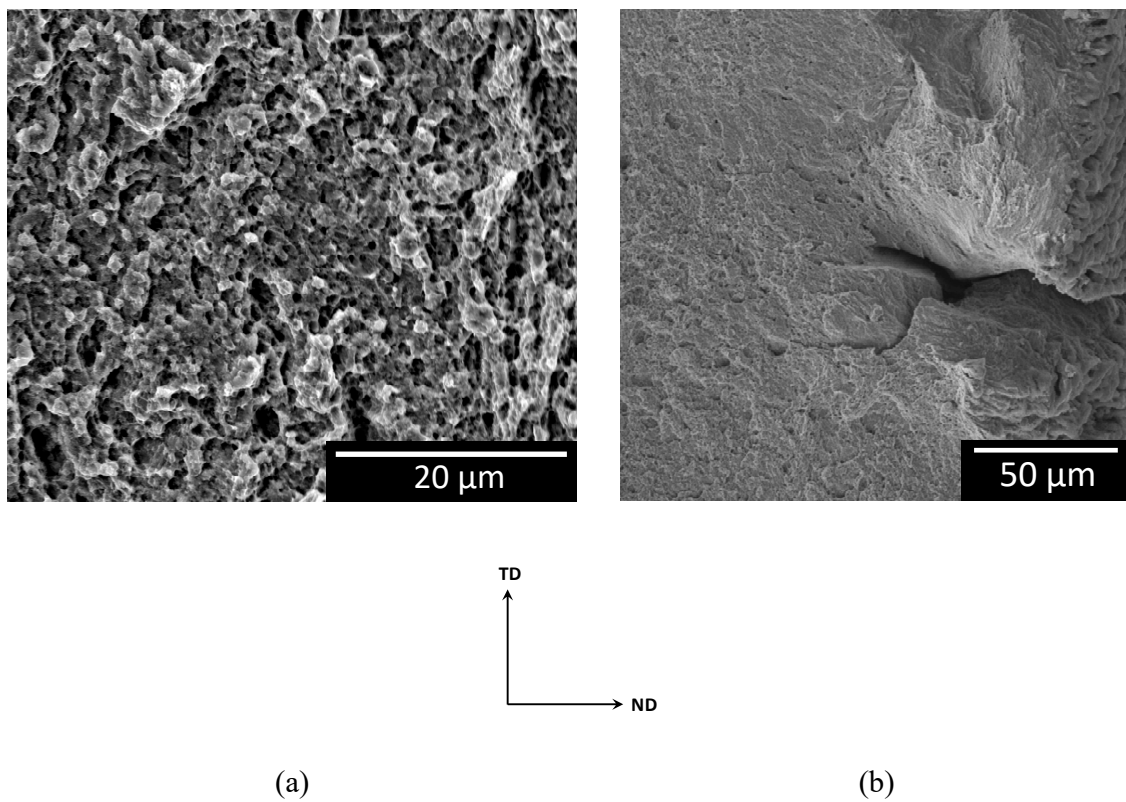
Representative secondary electron images of the fracture surface for FFA-coated NiCrMoV steel tested in 0.01 M acetic acid at 90 °C (a) ductile dimples, (b) more embrittled fracture surface showing stress-corrosion cracking at the edge of the sample.
